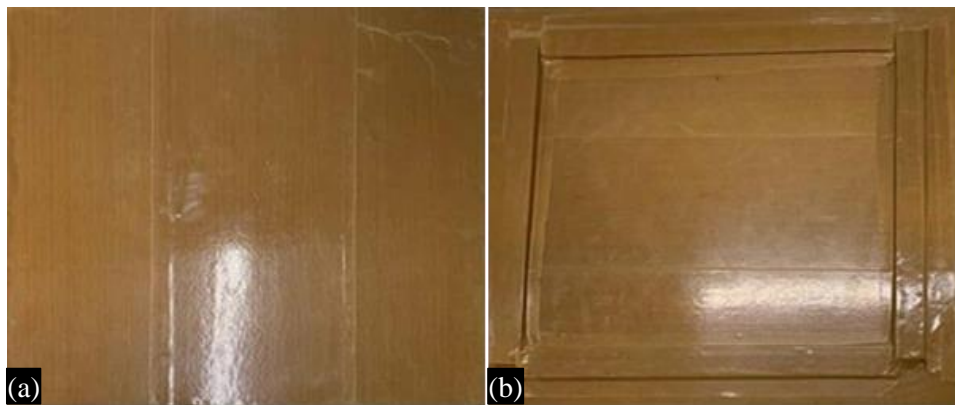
MS Sheet Mould, (a) MS Sheet Fixed, (b) MS Sheet Removable.
